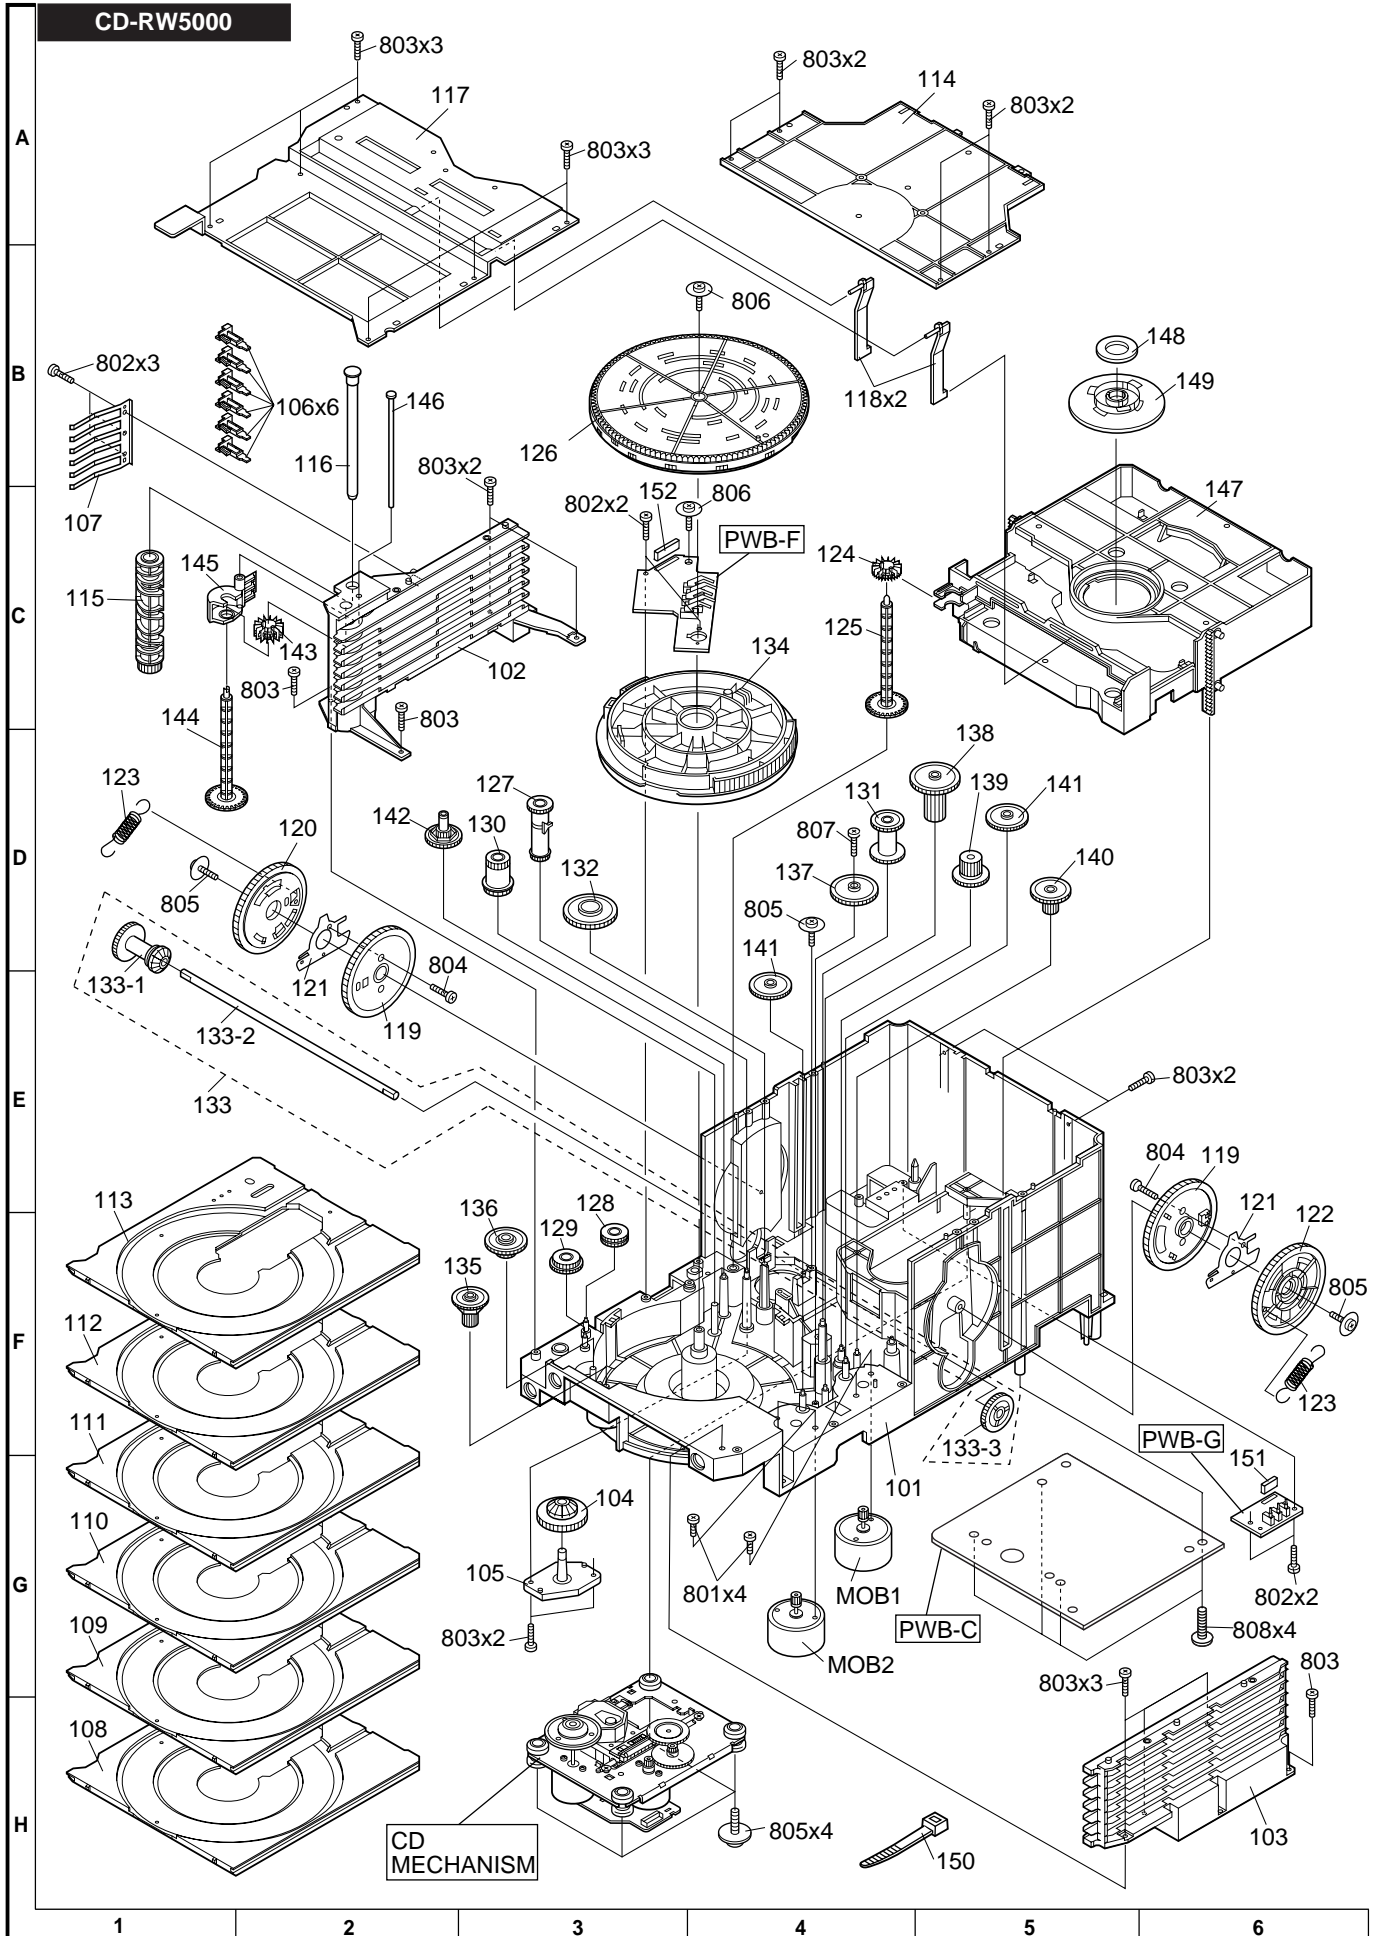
CD CHANGER MECHANISM EXPLODED VIEW
